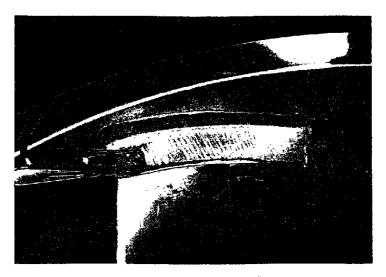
Pump turbine Isogyre, Malta Oberstufe/ÖDK, Carinthia 60 MW, 35  $\rm m^3/s$ , 50 - 200 m, 375/500 1/min welding with Cavitec
